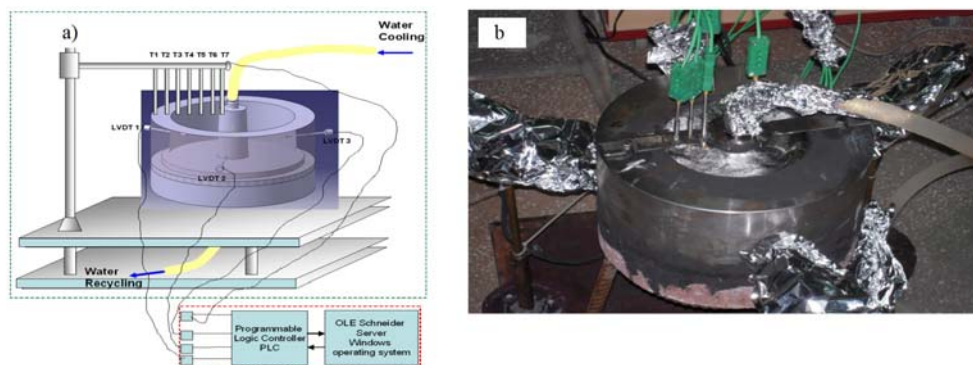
Experimental set-up for aluminum casting: a) the set-up of the casting device, with the T1-T7 thermocouples and the 3 transducers, mounted like in the experiment described in Hernandez *et al.* [1]; b) the top poured cylindrical mold, filled with AC4CH aluminum alloy.
